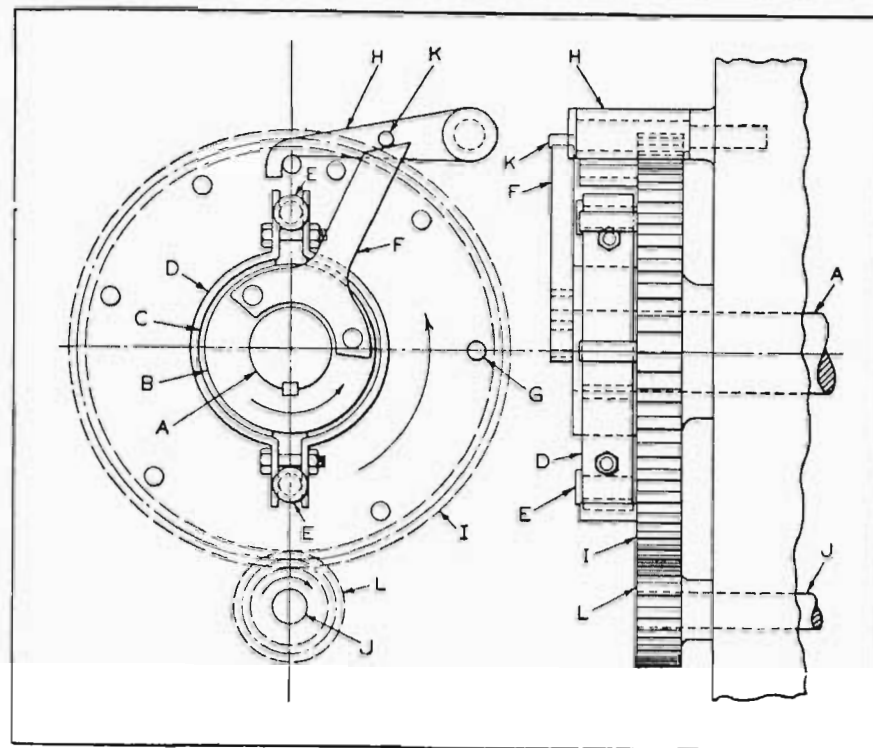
Mechanism Designed to Transmit Intermittent Rotary Motion to Shaft *J* from Shaft *A* with Varying Length of Rotating Periods between Eight Successive Dwell Periods.
